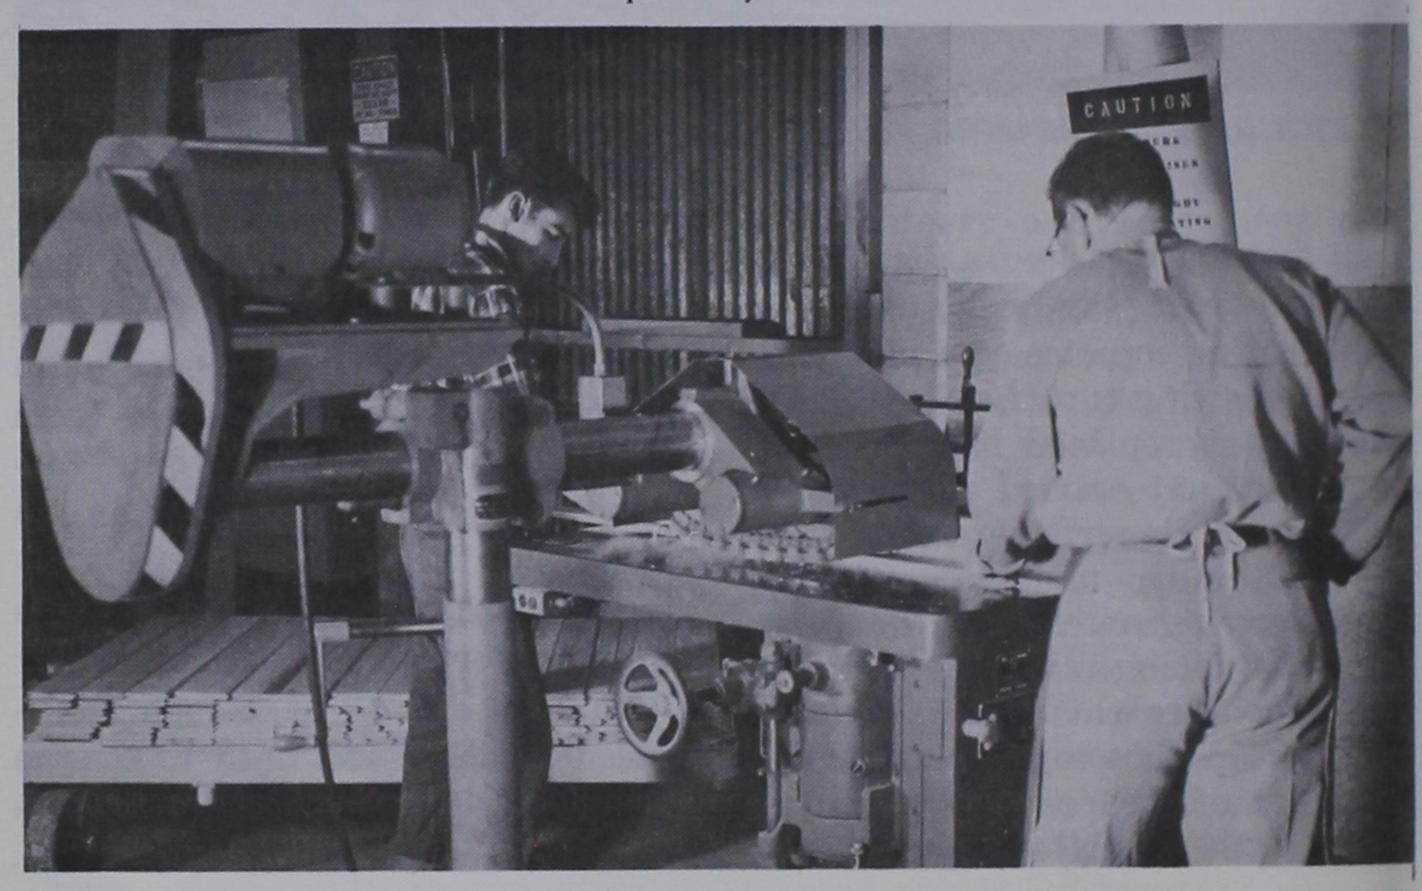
Ripping operation from outfeed end of surfacer showing two ripsaws with tailboys, belt conveyor, and sorting table.
